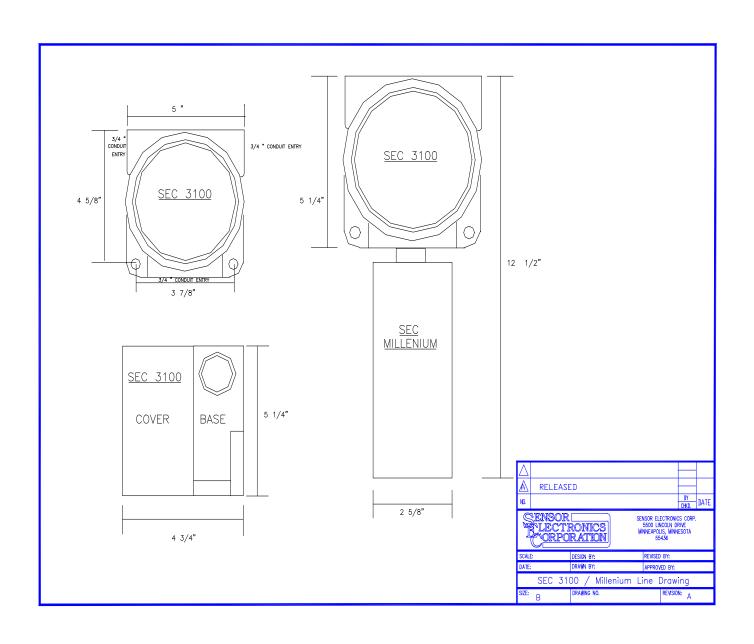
SEC 3100 – SEC Millenium Mounting
